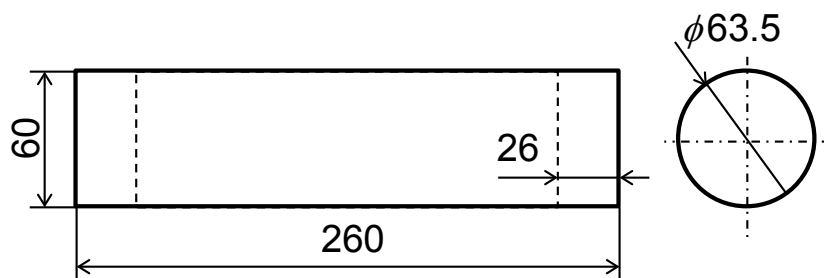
Specimen for the internal pressure- axial compressive test.
